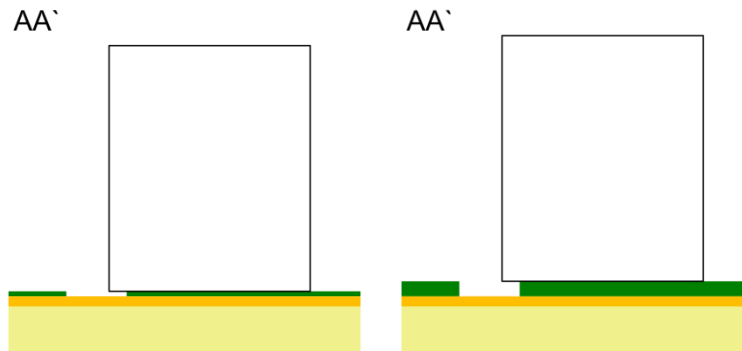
Layout of copper and solder mask for solder masks both thinner(left) and thicker(right) than the copper layer when copper pads are fully extended below the package.
